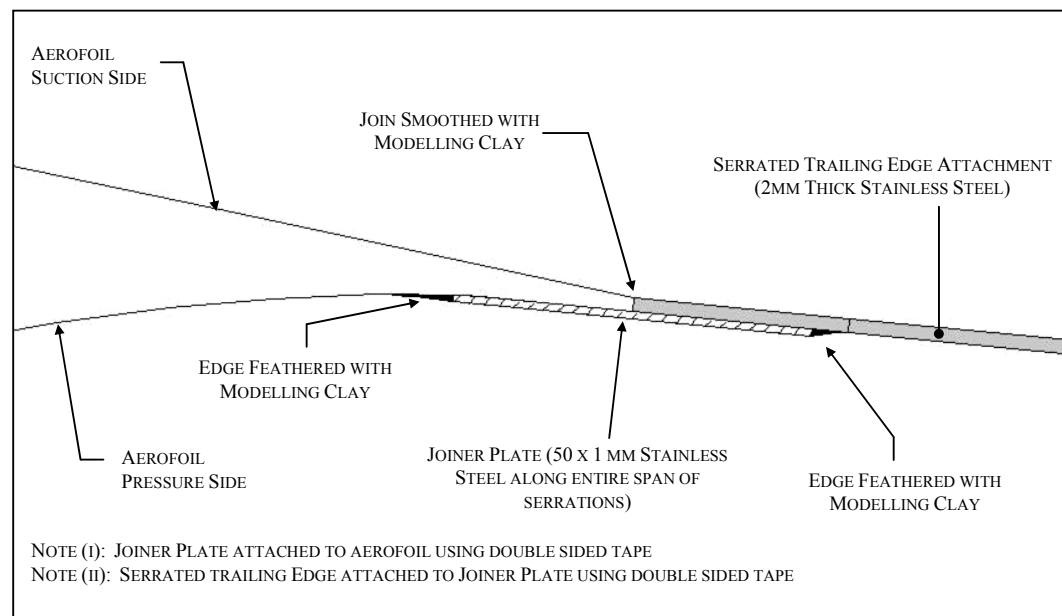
Serrated Trailing Edge Attachment Method
